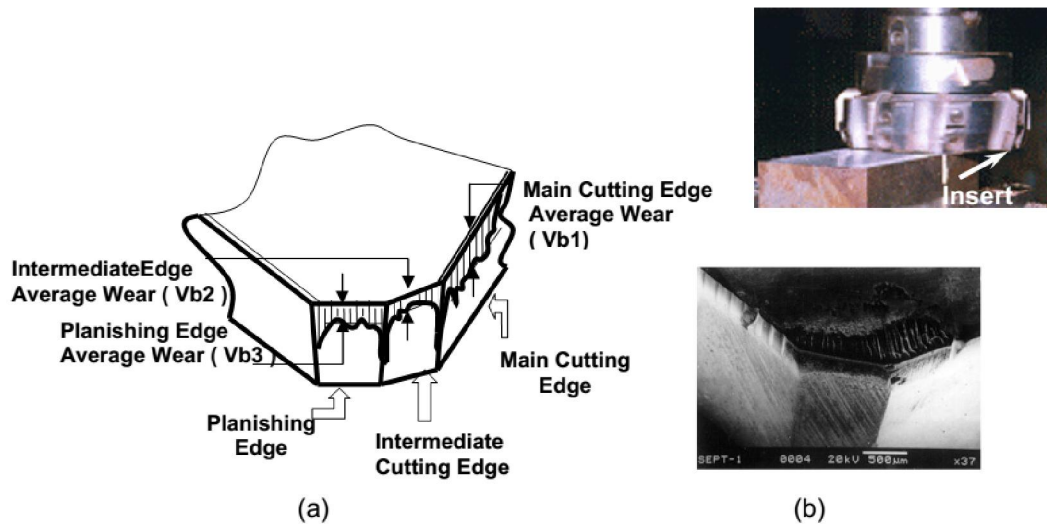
Schematic (a) and actual view (b) of wear pattern of face milling insert
